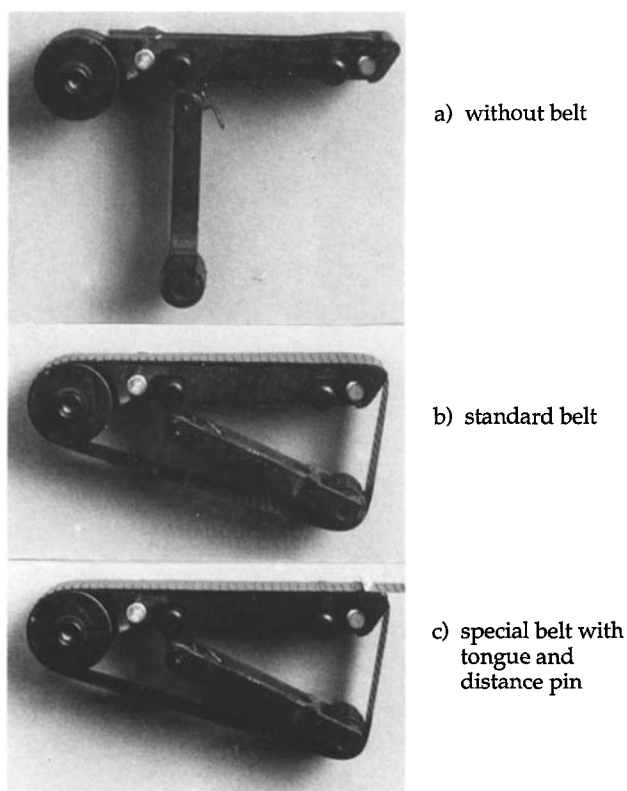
Metal belt fixture (a) without belt, (b) with conventional belt, (c) with special belt to which a metal tongue is welded for bridging the gap between the clamp and the table of the sample supporting system. In (c) also the pin is shown that prevents too much squeezing of low viscosity samples before the test is started
